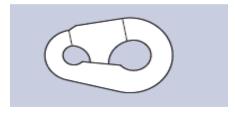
Connecting link pear shaped (Source: Vryhof Anchors)
